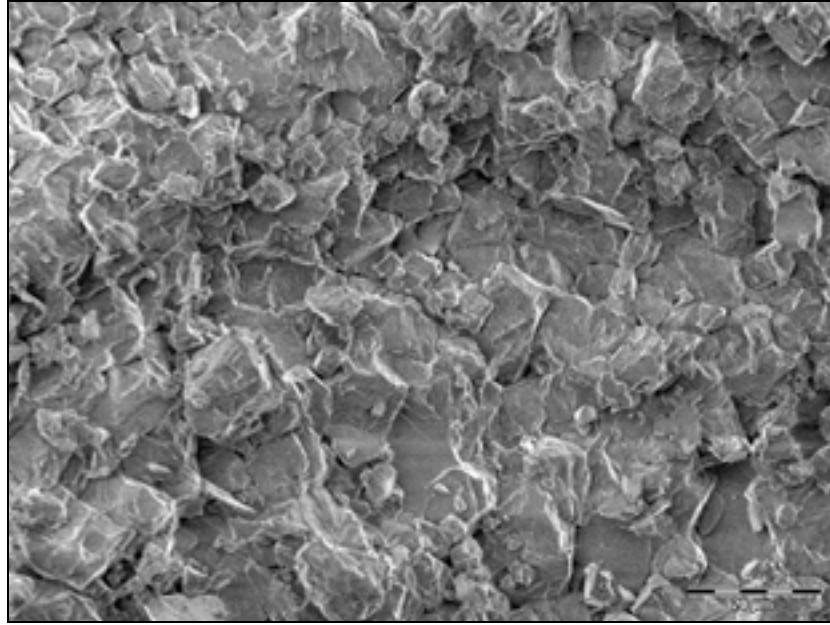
ESEM photo of fracture surface for type V.
